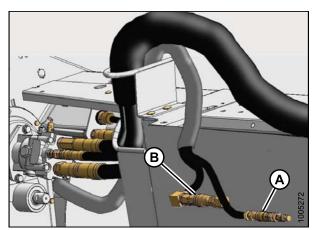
Auger Pressure and Auger/Reel Return Hose Couplers – 14-Ft. and 16-Ft. Header Shown (18-Ft. Similar)
